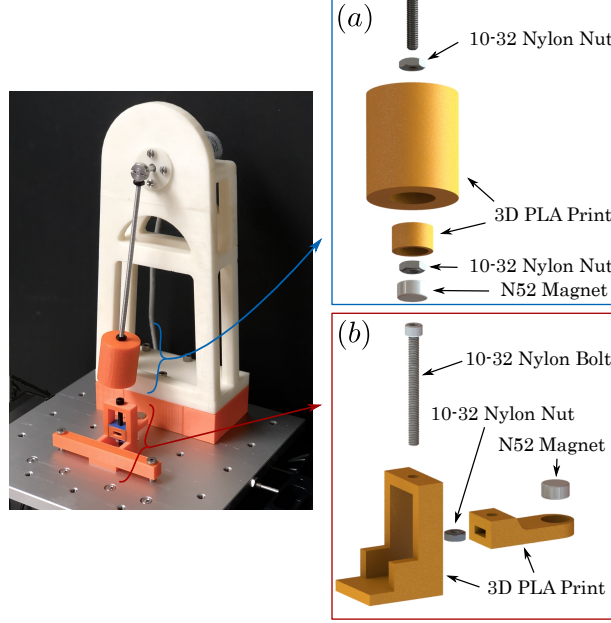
Manufacturing overview with experimental setup. In Fig. (a), an exploded view of the end mass (100% infill 3D printed PLA components) is shown with the magnet press fit into end of pendulum. In Fig. (b), an exploded view of the linear stage controlling the vertical position of the lower magnet.
